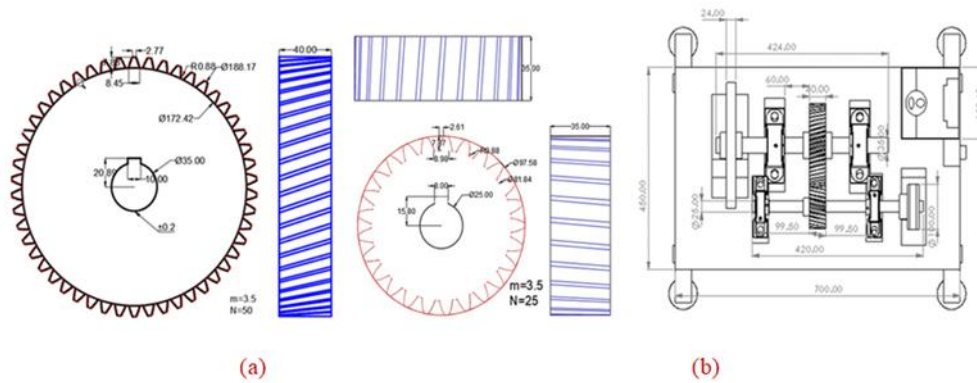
Gear model for the rotational system: (a) Helical gear dimensions; (b) Test rig sketch.
